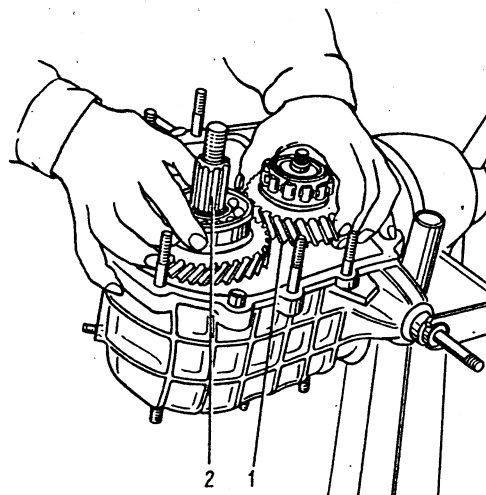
Installation of Drive Shaft and Countershaft:
